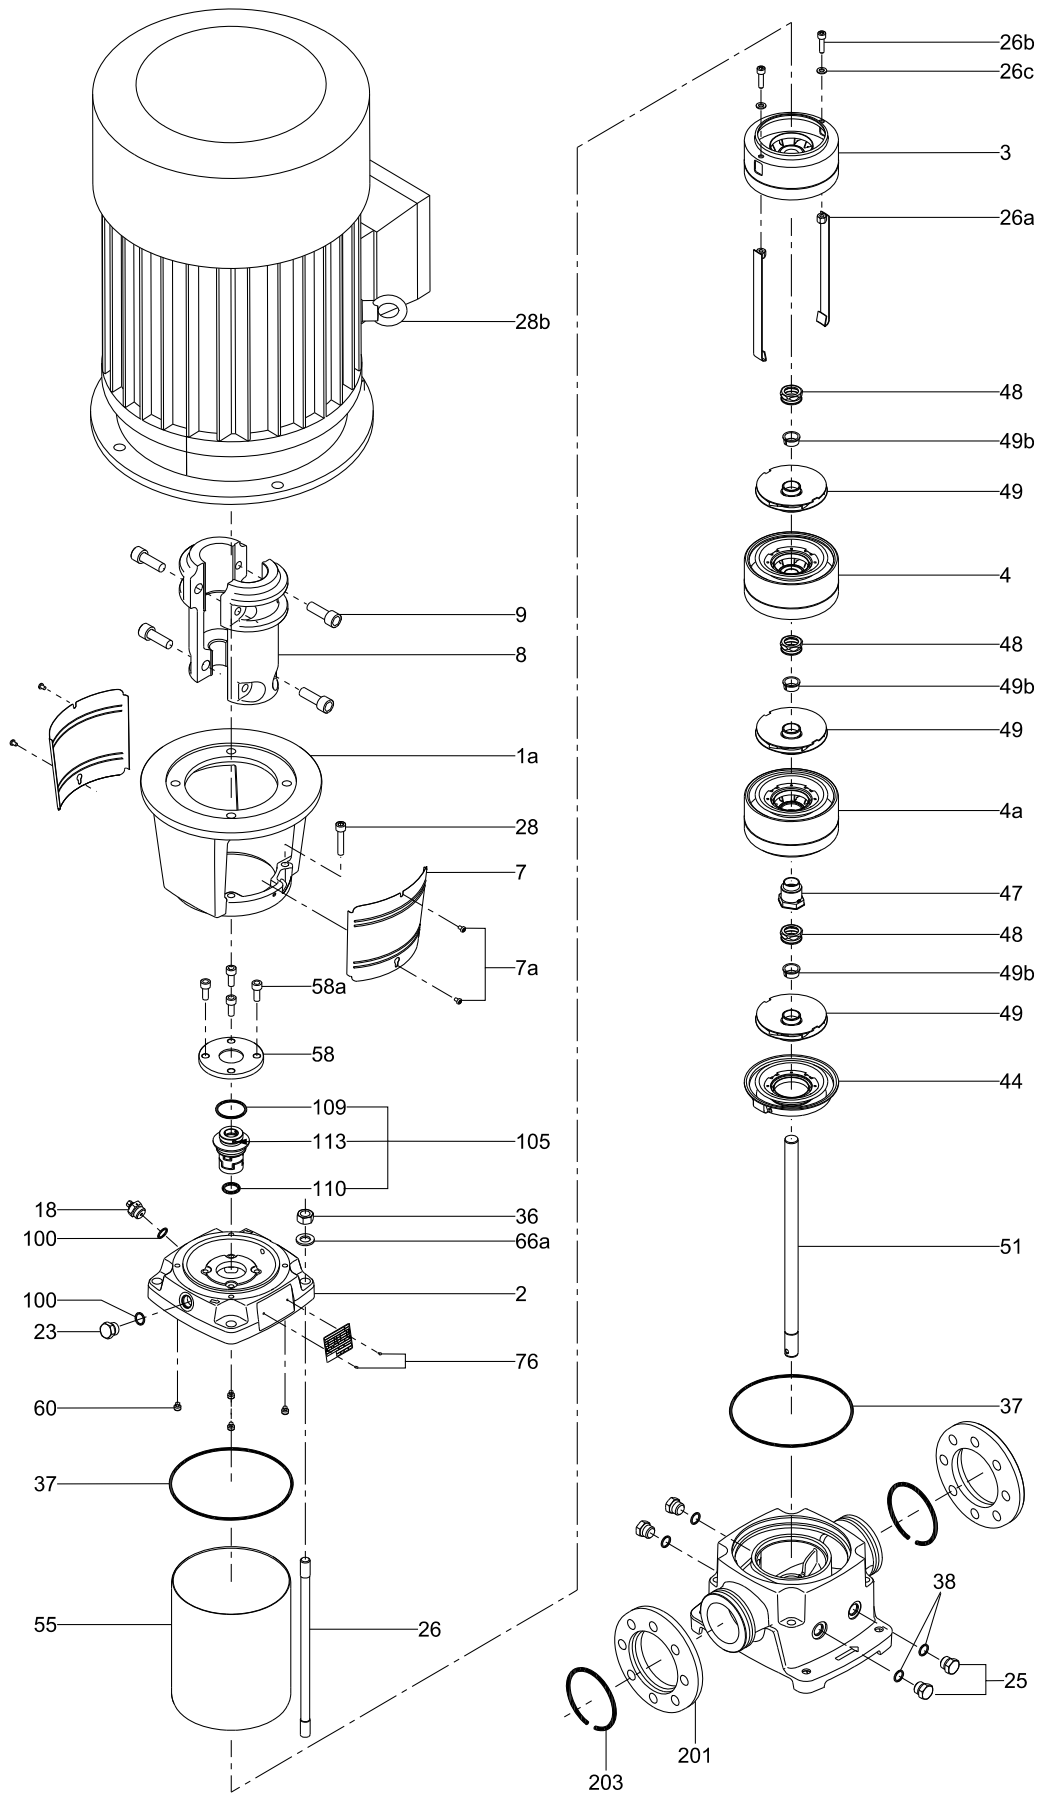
Exploded view, CR, CRI, CRN 32, model B
